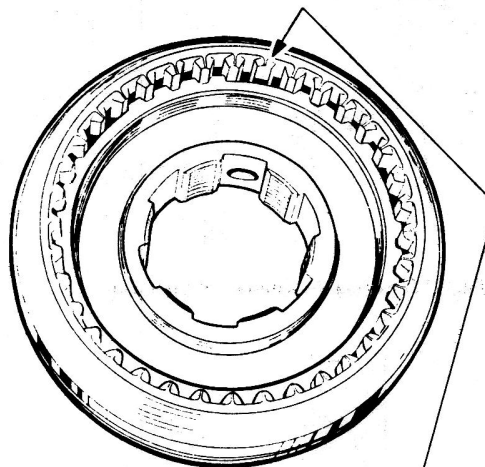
Assembly of the operating sleeve to the inner synchronising sleeve
